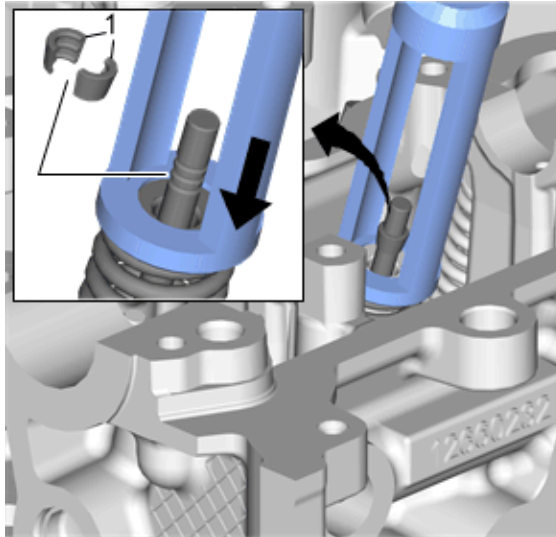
Special Tool To Remove/Install Valve Stem Keys
